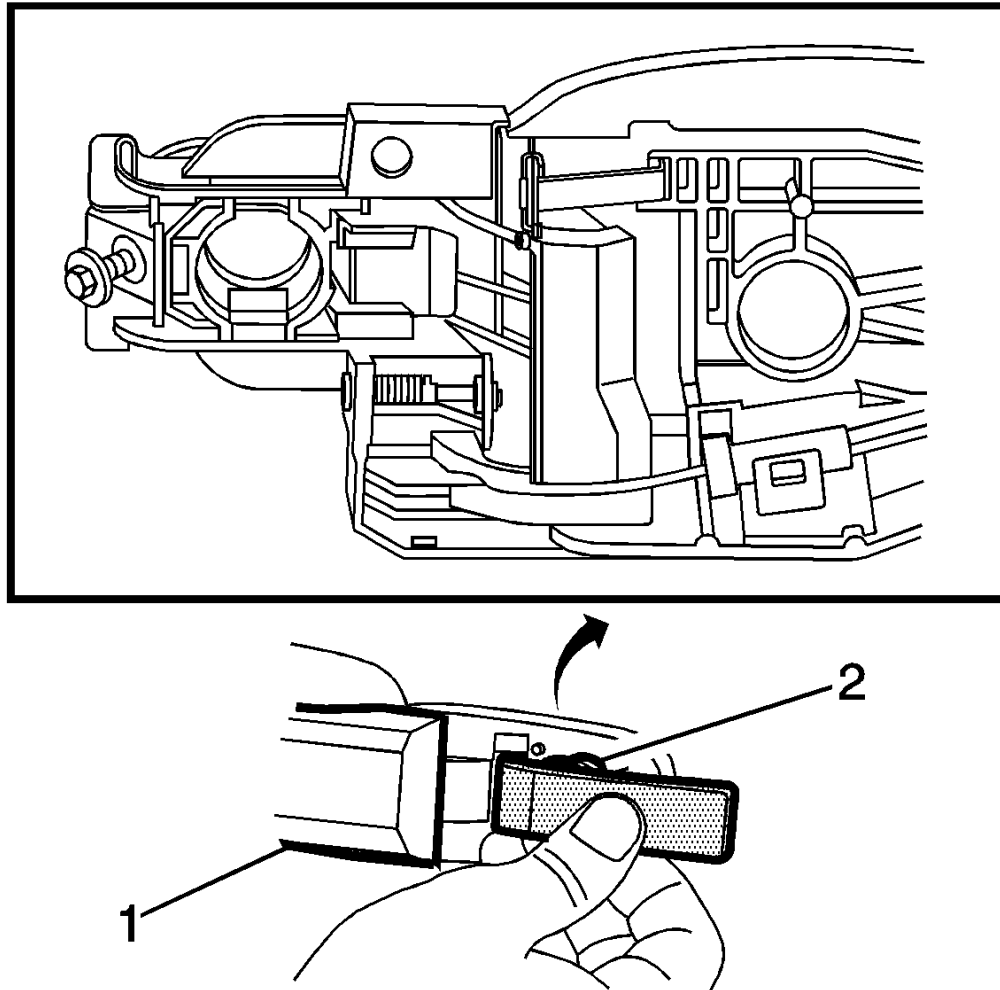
Front Side Door Outside Handle And Door Handle Spring Retainer
